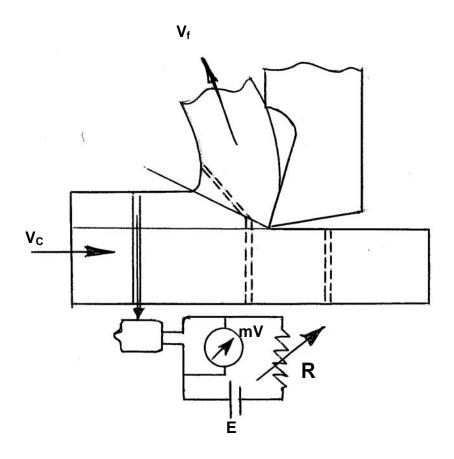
Measuring temperature at shear plane and tool flank by photocell technique
